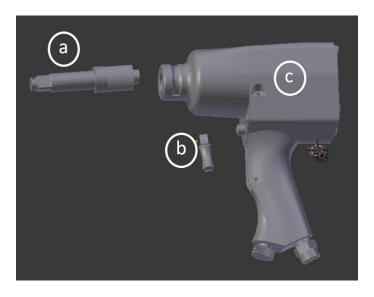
The current 3D CAD model modified in Blender a) the wrench head, b) the wrench trigger switch and c) the wrench body
